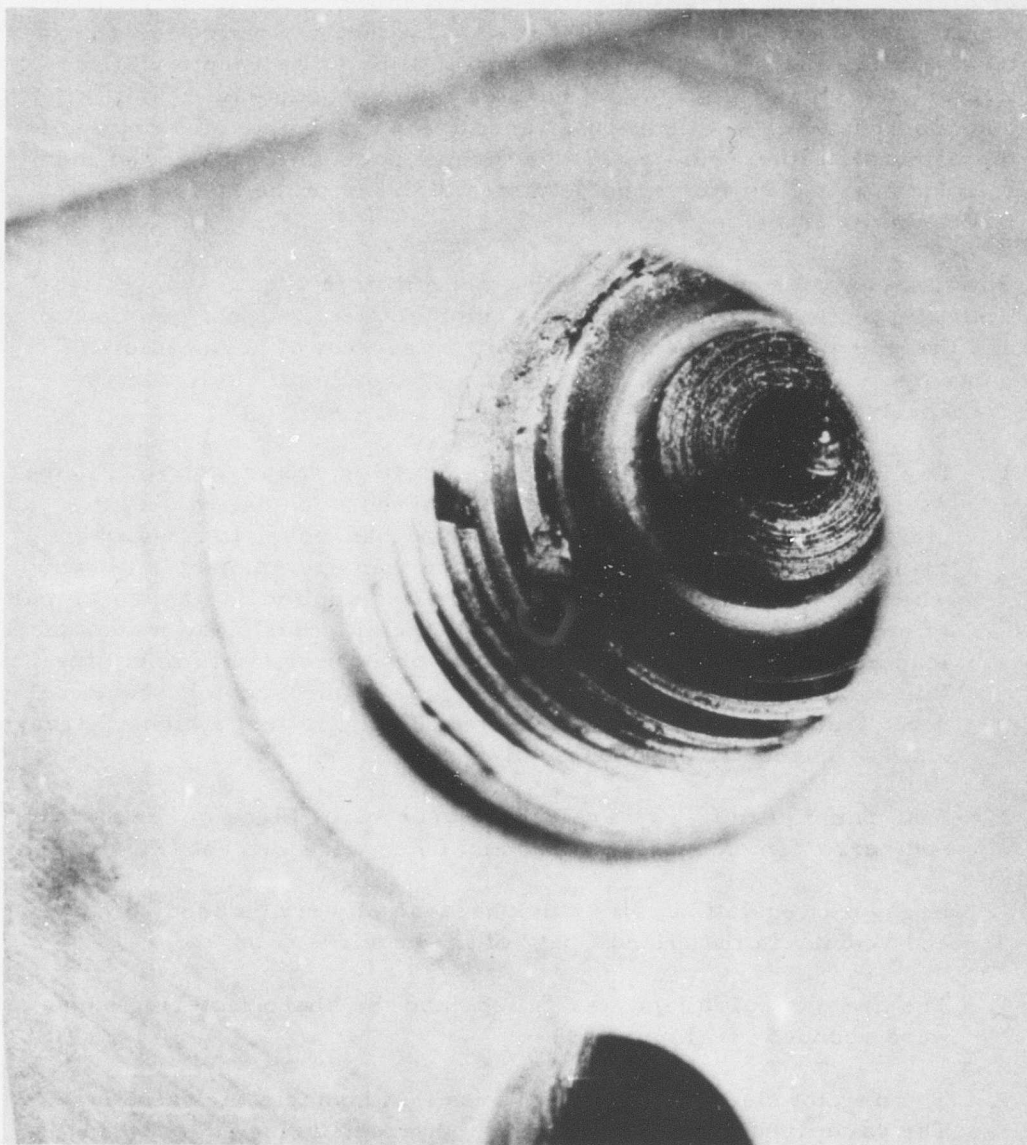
Fuel Manifold After Engine Test Showing Deposits in Nozzle Receptacle; Close-Up View. Magnification: 8X
